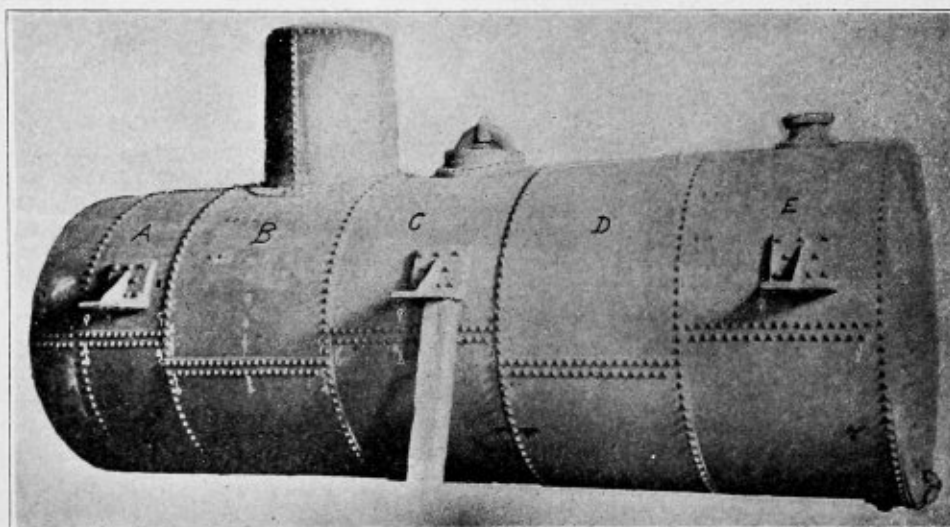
STEAM BOILER NO. 4084 BEFORE TESTING
